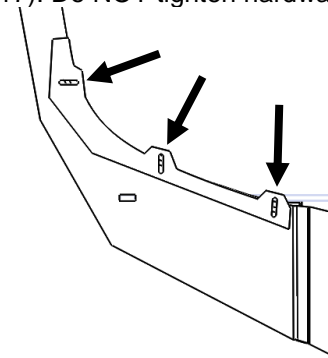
Top View of Pre-Cut Head Light Trim Holes
